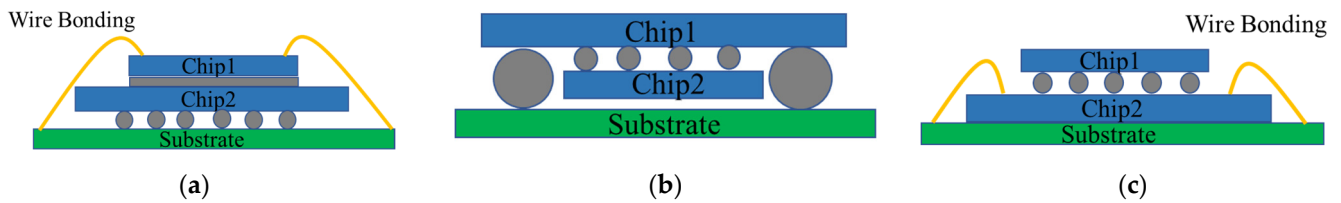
Double-stair die stacking: (a) top chip bonding and flip-chip solder ball interconnection; (b) inverted solder ball interconnection; (c) bottom chip bonding and flip-chip solder ball interconnection.
